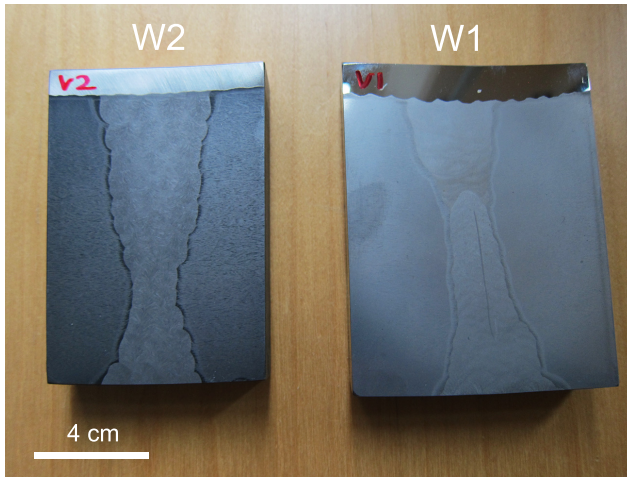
The pressurizer welds W1 and W2.
